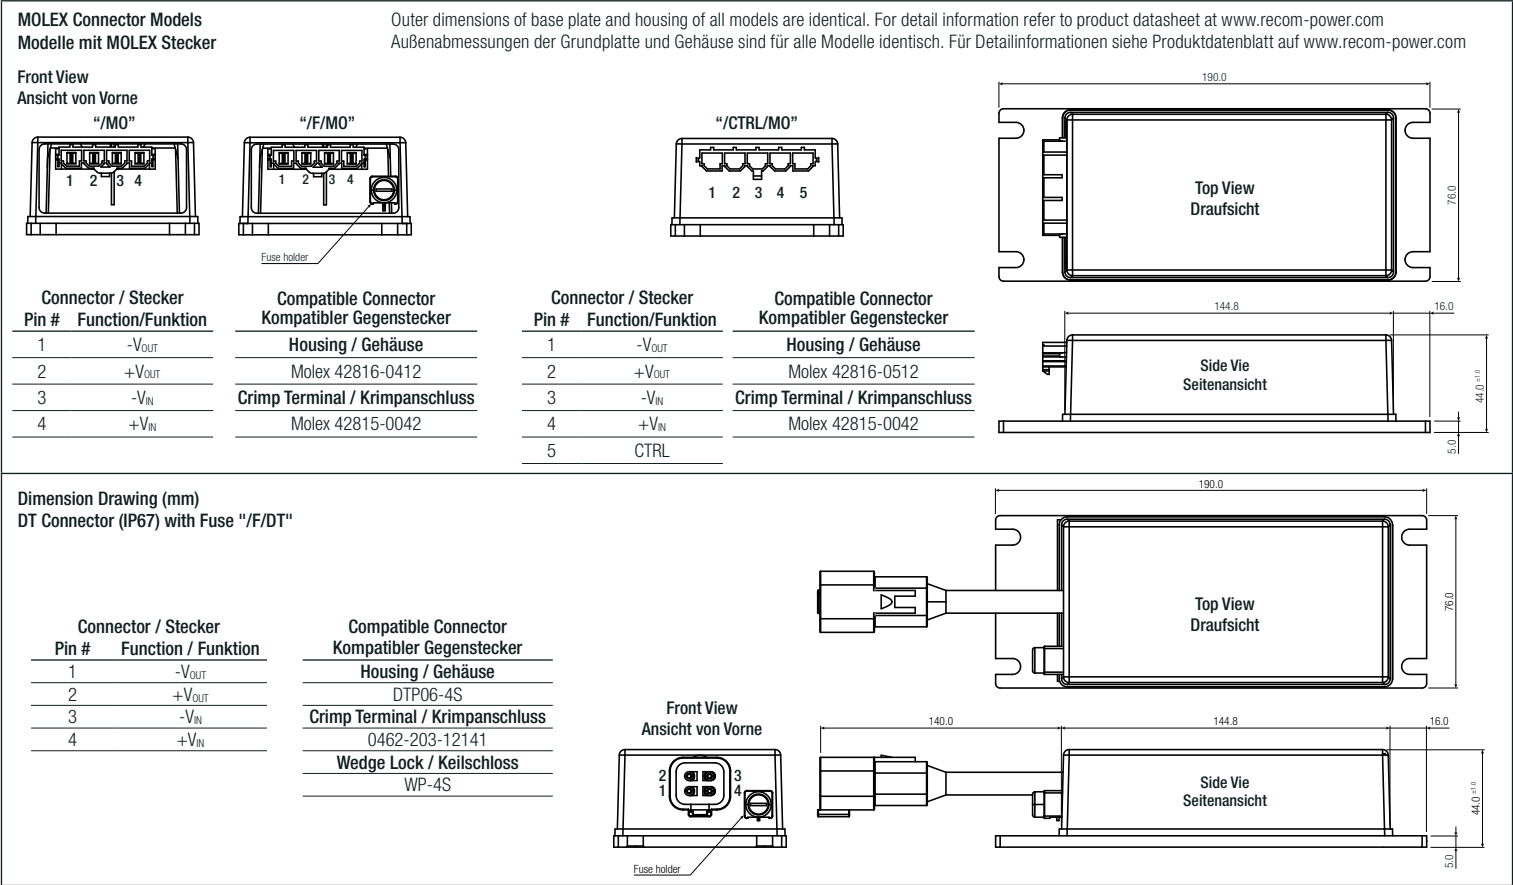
Mechanical Dimension (mm) / Abb. 2: Mechanische Dimensionen (mm)
